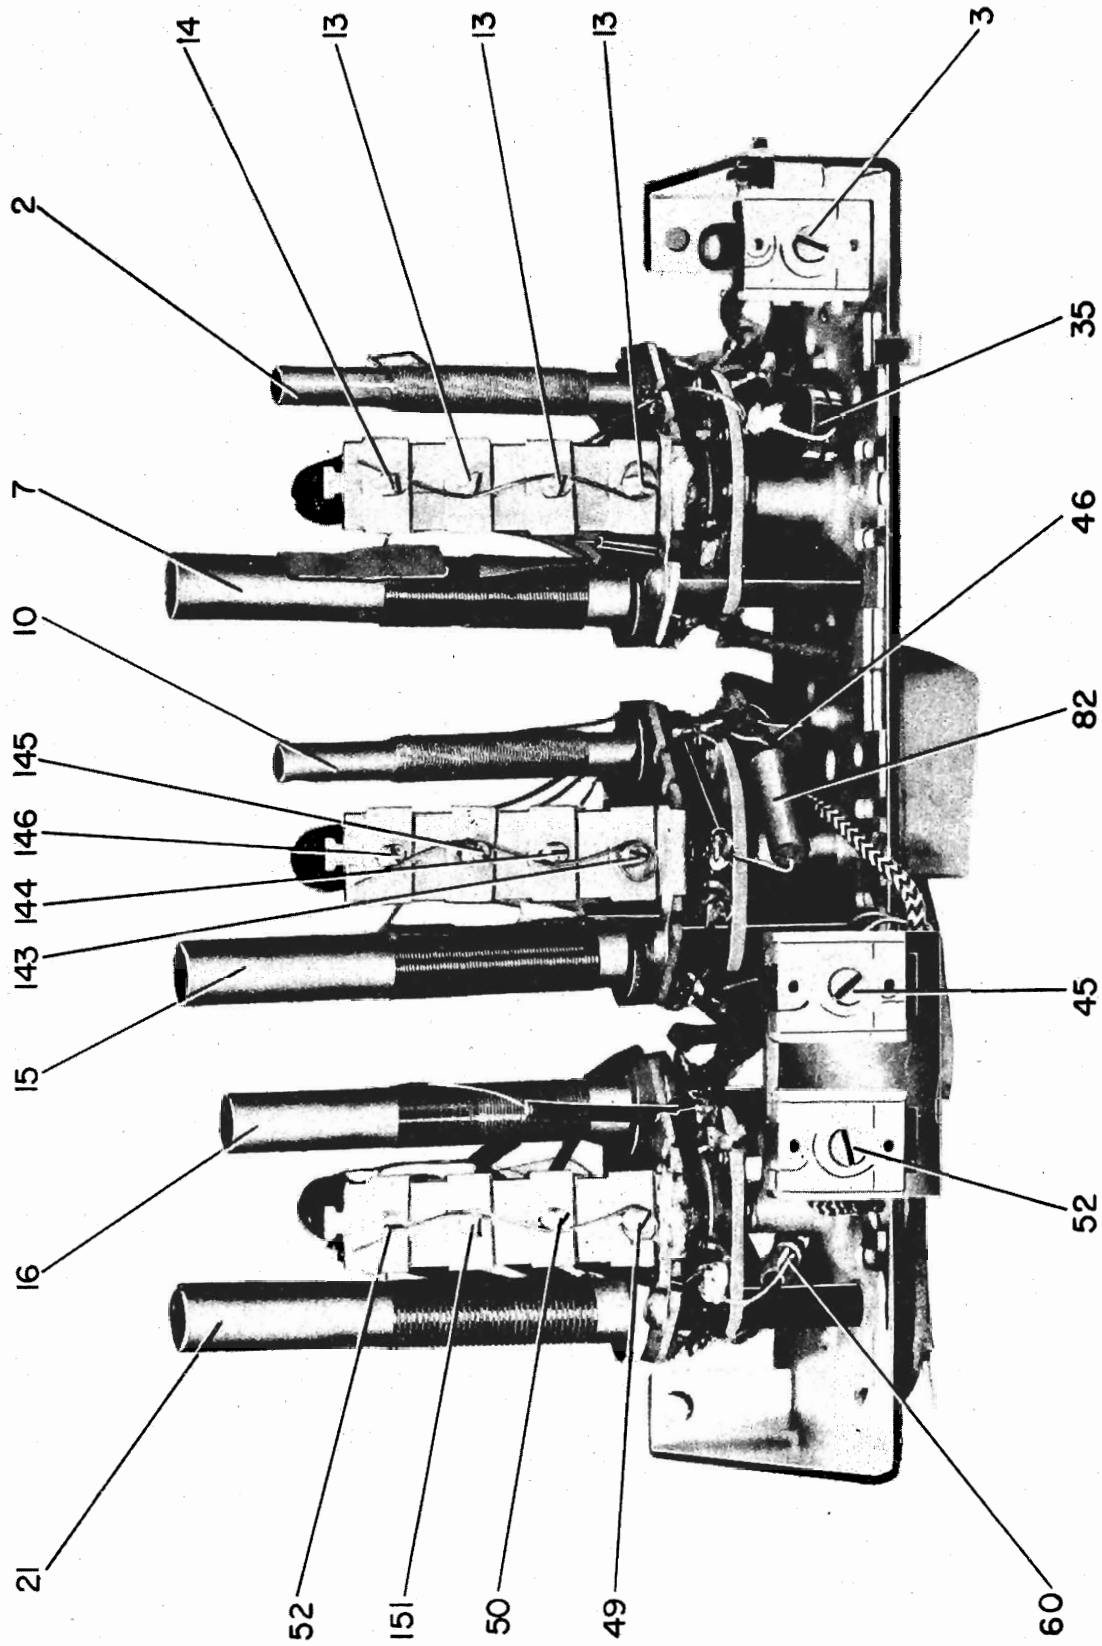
COIL ASSEMBLY (BOTTOM VIEW)—RADIO 985794
